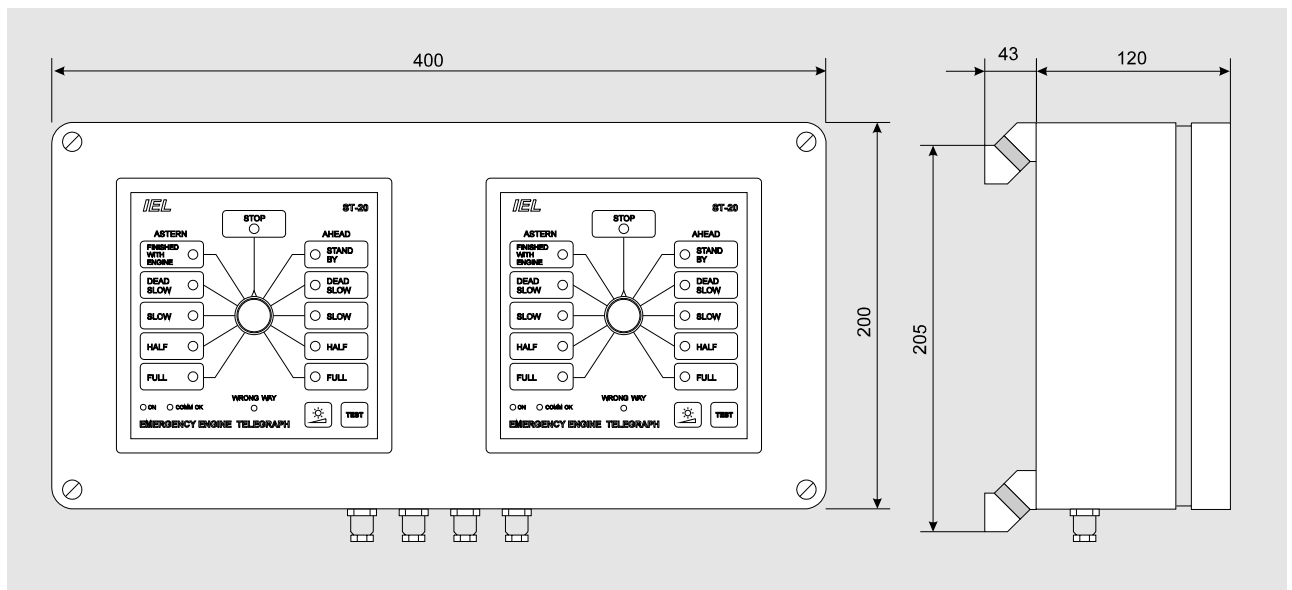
ST-20 - bulkhead mounting in engine room (option)
